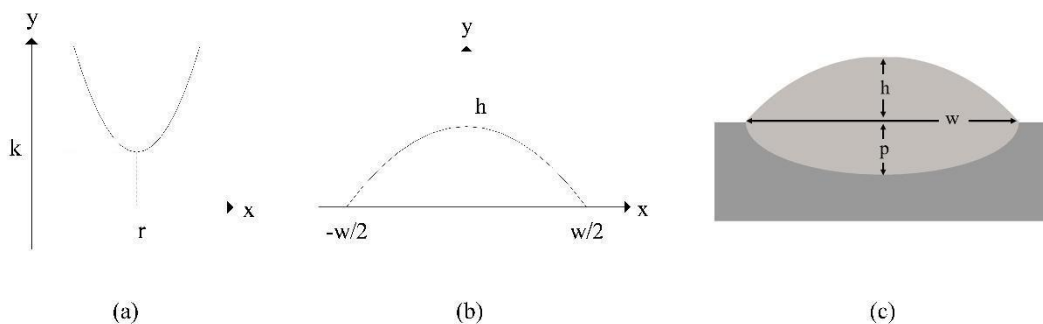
Parabola to weld bead slice simulation. (a) Graph of a parabola (b) Parabolic shape decided for weld bead (c) Weld bead slice shape and its parameters
